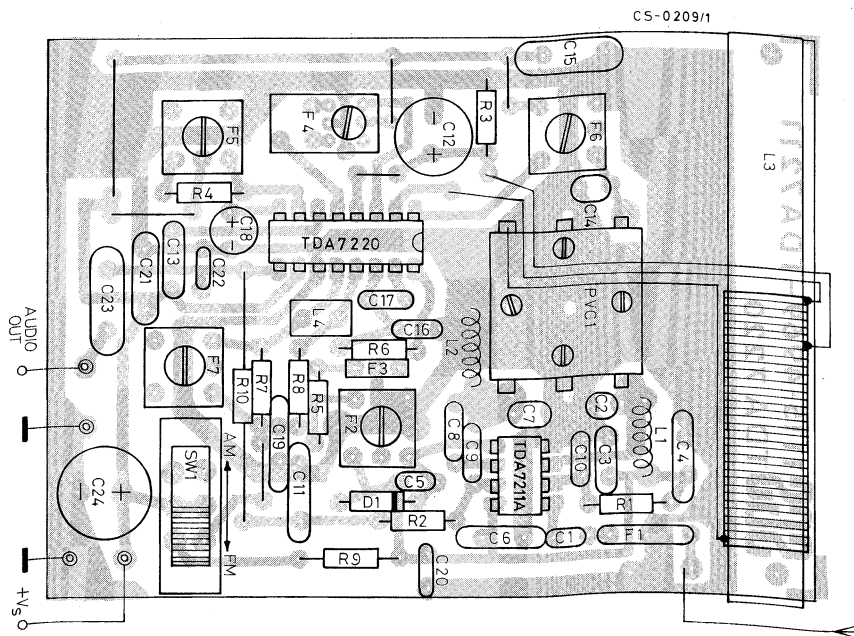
P.C. board and components layout of the circuit of fig. 3 (1:1 scale)
